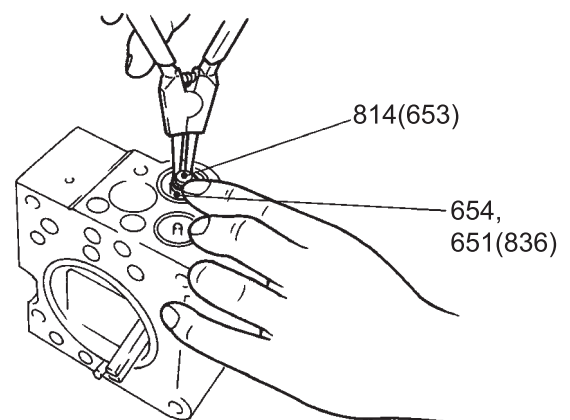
Removing spring seat (653), return spring (654) and sleeve (651)
